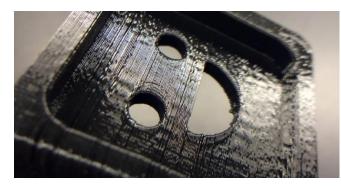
A PLA Printed Part with Visible Imperfections [32].
